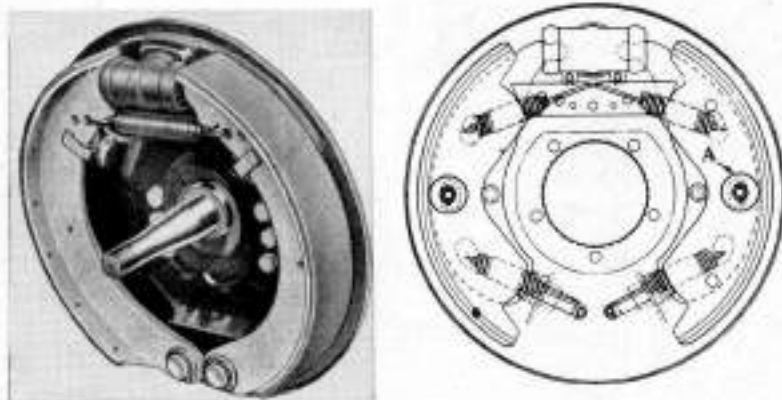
TYPICAL FRONT AND REAR BRAKE ASSEMBLIES
